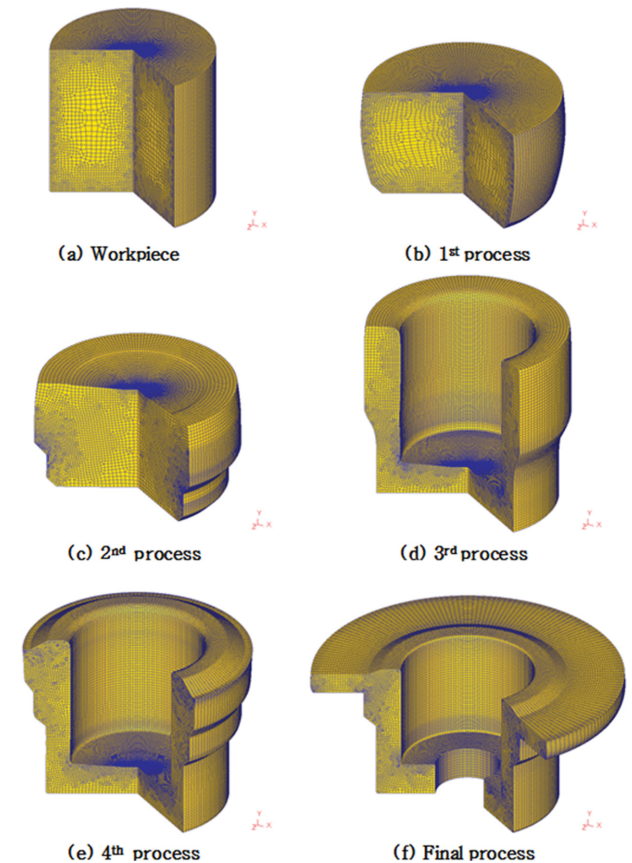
Configuration of spring retainer forging at 6 stage cold forging process.
